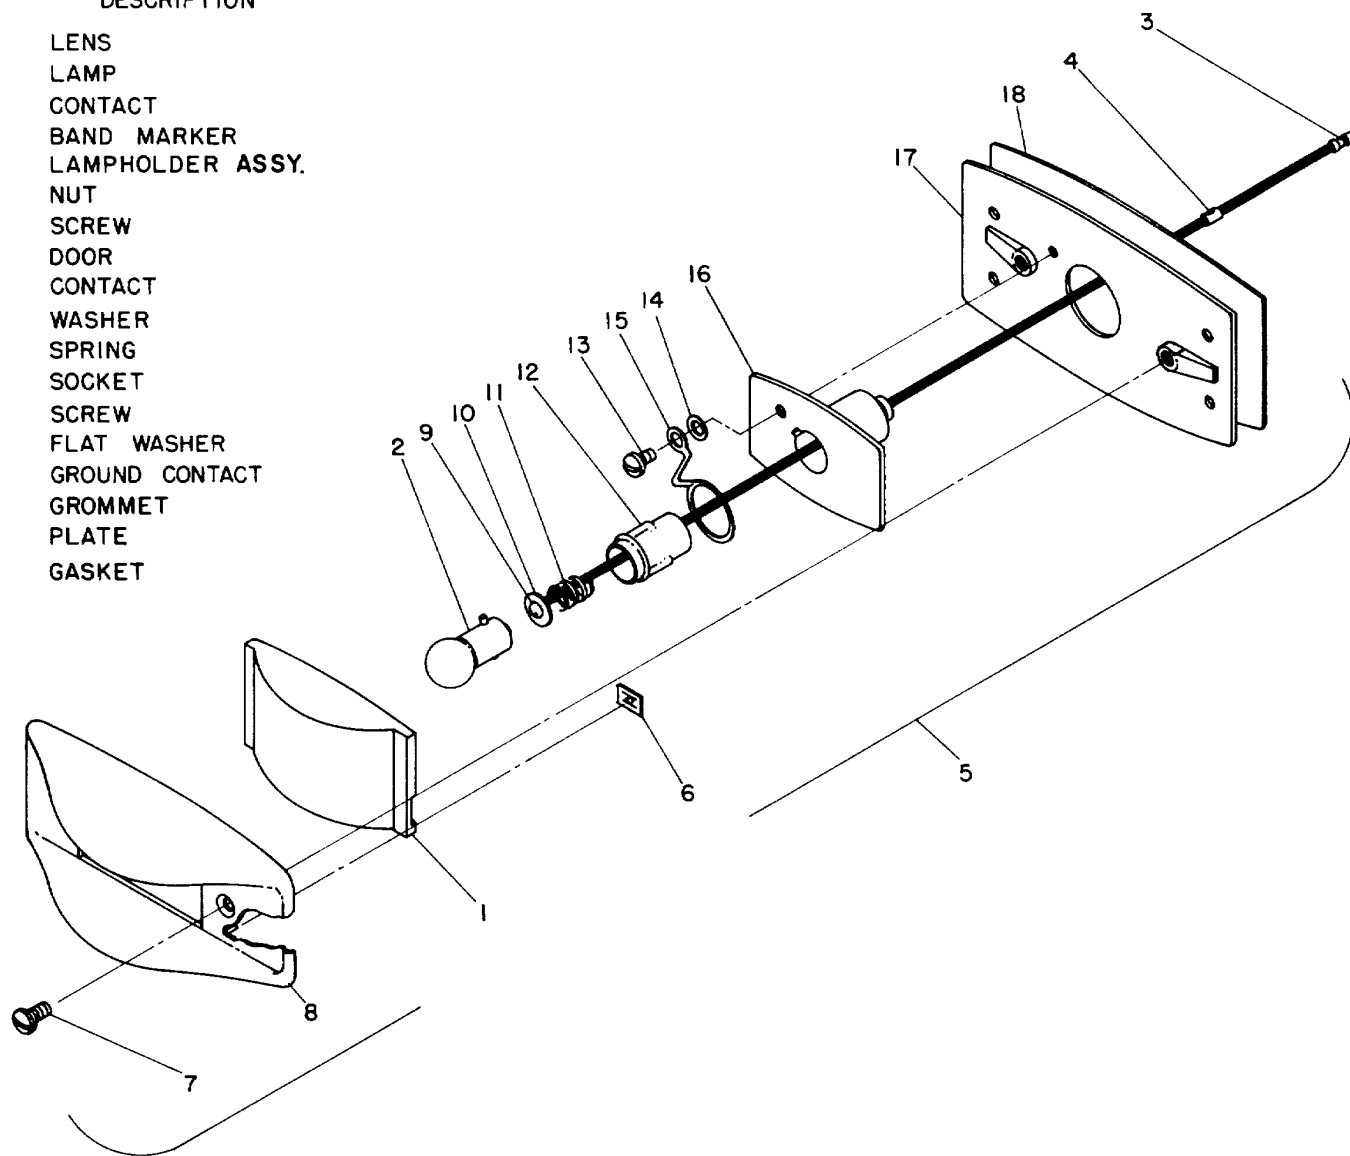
Clearance Lamp Assembly (Blackout or Service)
